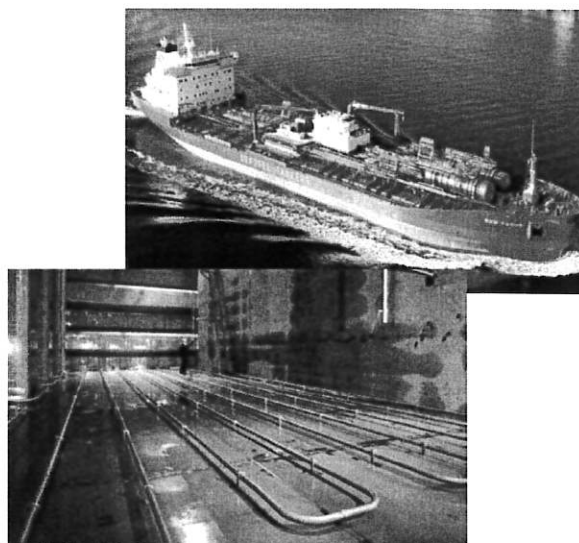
An application of DW-316LP: welding a storage tank (bottom) of a chemical tanker (top) with full penetration in all positions.
